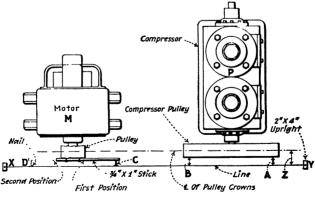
Aligning a machine which has a pulley with irregular edges.
